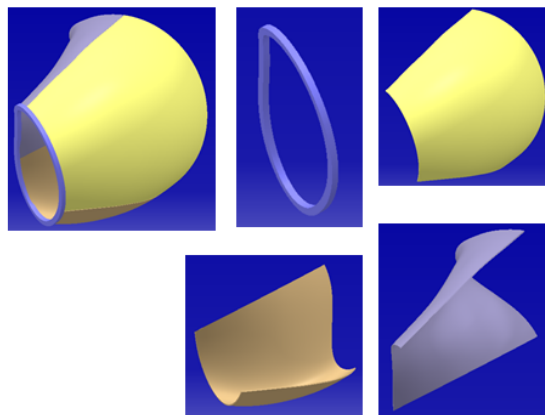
Type B section of main vessel, that is manufactured with 6 plates bent with old, 2 large flanges to prevent welding deformation and 13 ports
